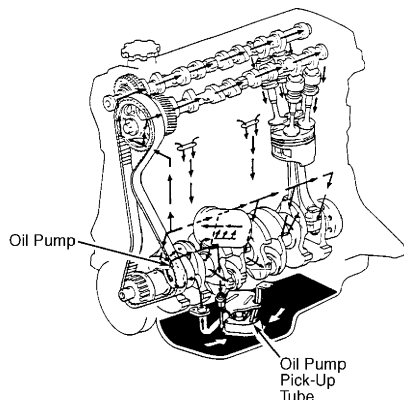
^{93A00497} Cross-Sectional View Of Engine Oil Circuit
